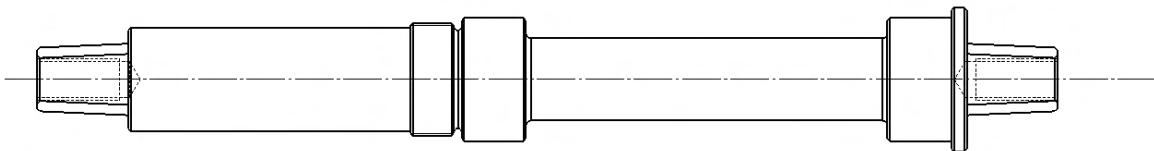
Schematic of the bottom bracket spindle geometry;
